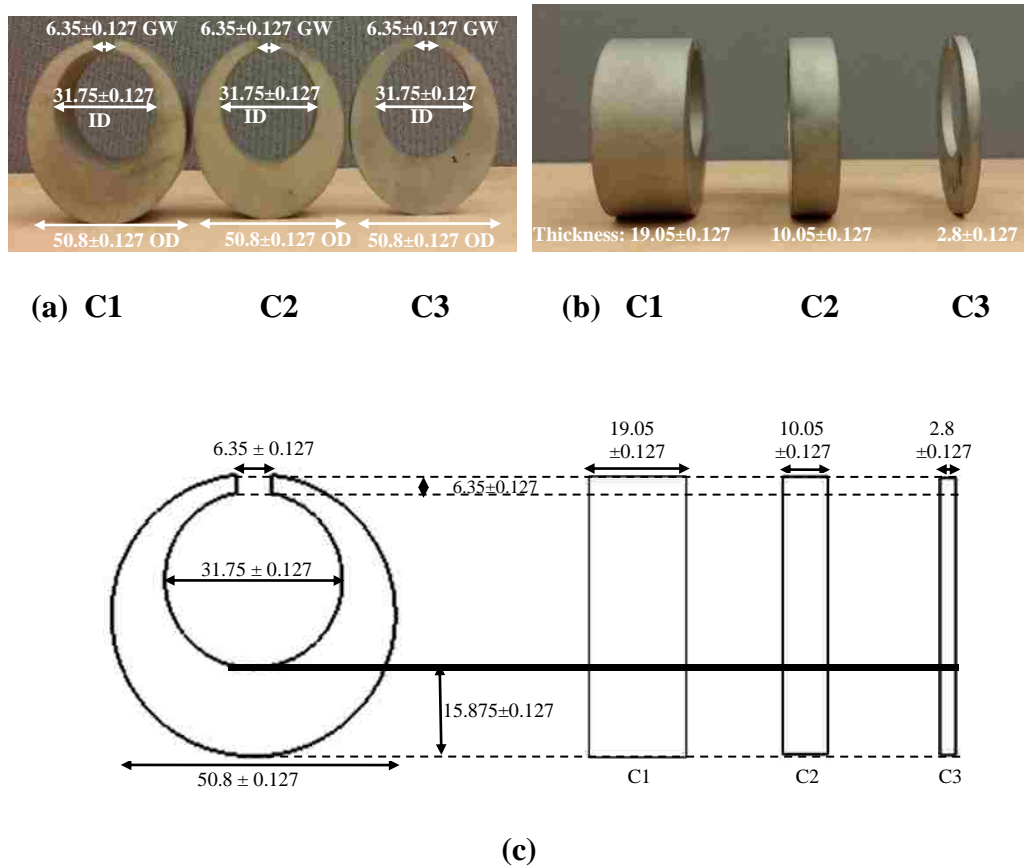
(a, b) Navy C-ring specimen geometry, (c) schematic for Navy C-rings C1, C2 and C3 (dimensions in mm).
